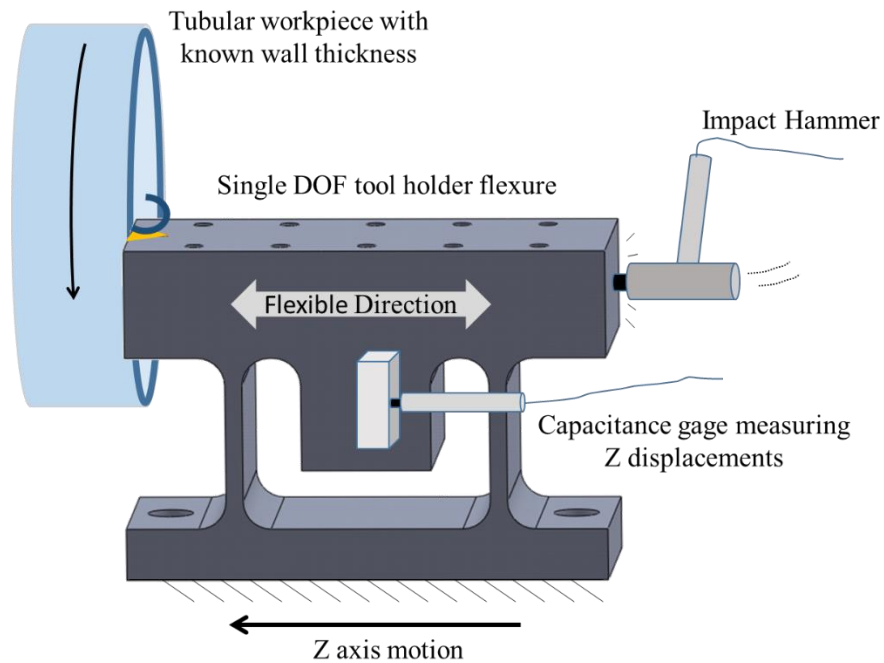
General experimental setup, using a flexure tool holder to machine a tubular work-piece.
